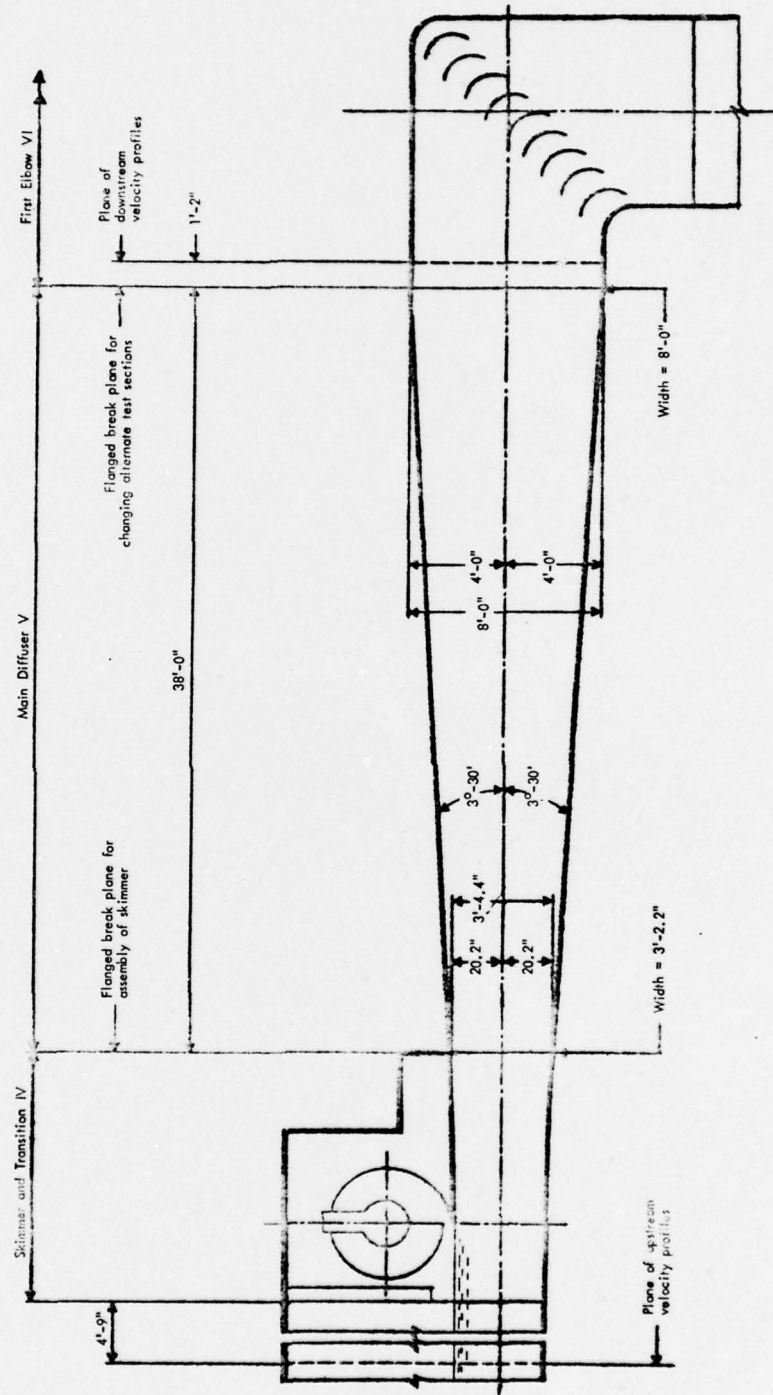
Main Diffuser Configuration (all dimensions relate to prototype inside flow surfaces)
